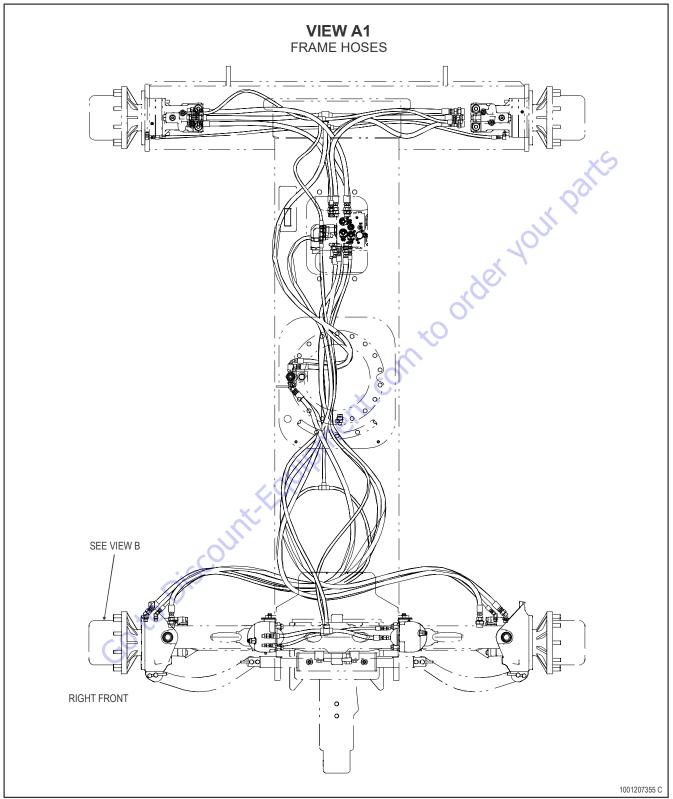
Hydraulics Installation - Sheet 4 of 28
